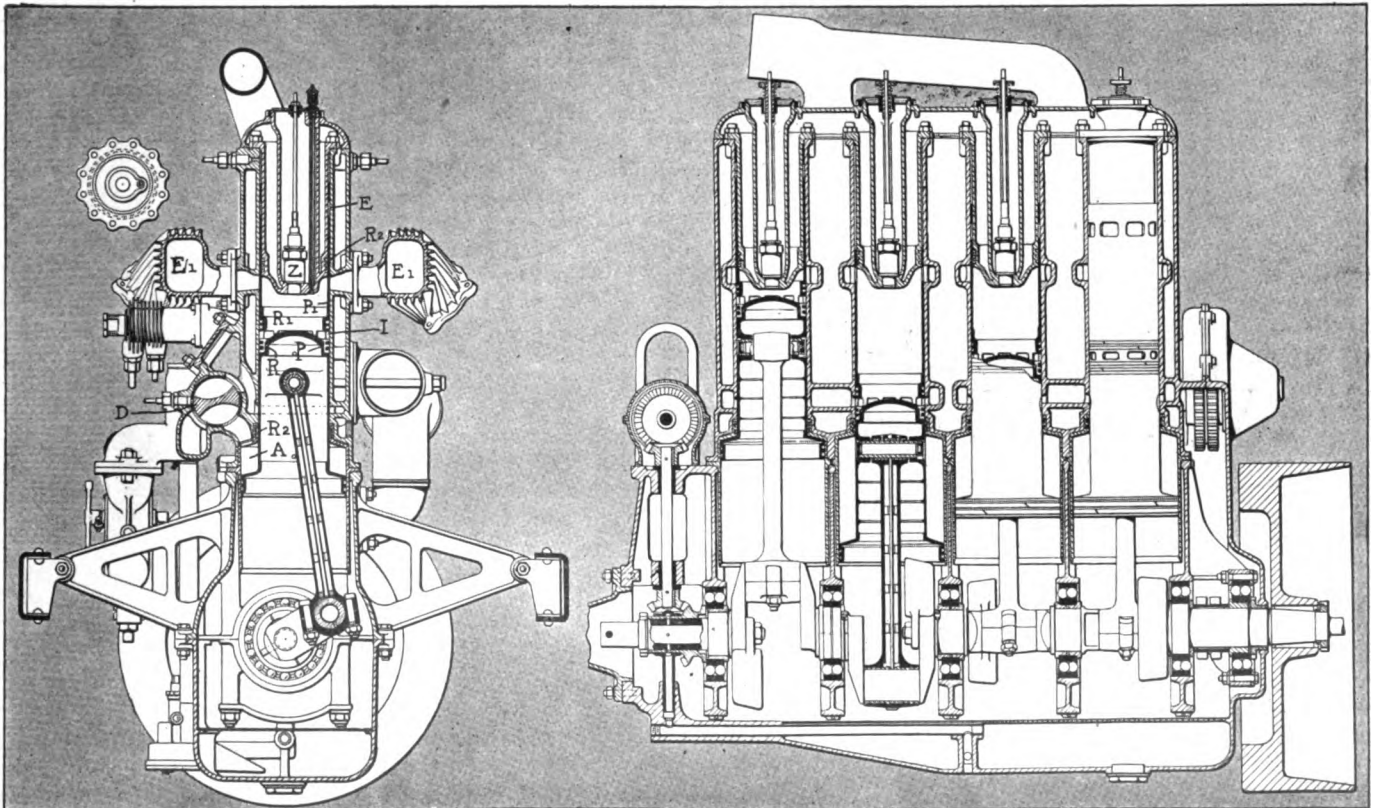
Transverse and longitudinal sections through the Koecklin motor, showing details of unique valve action
